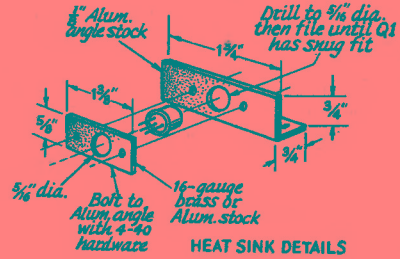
Layout and assembly details of another homemade heat sink. The completed assembly can be insulated from the main chassis of the transmitter by using insulating washers.
